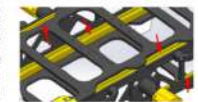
T-slotted Aluminum Extrusions shown inside the frame module indicated by the red arrows.
